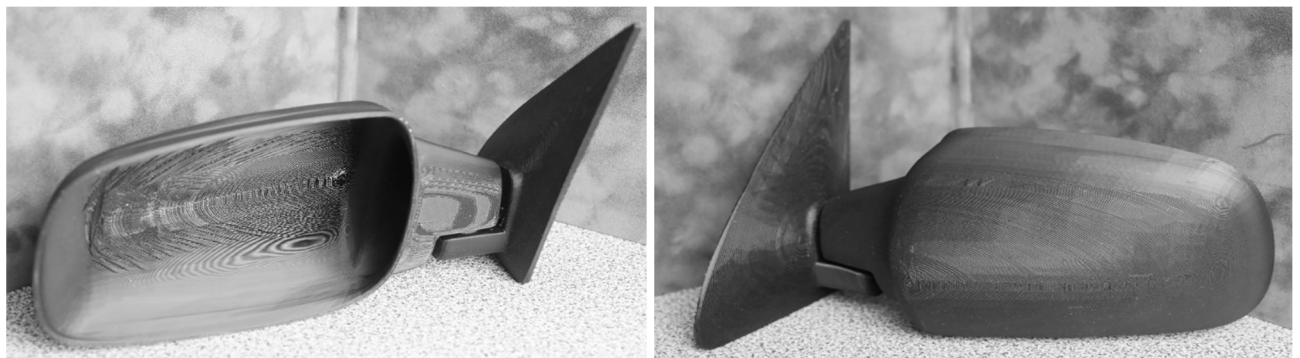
Mirror shell printing process with support material (left) and extruded mirror shell
